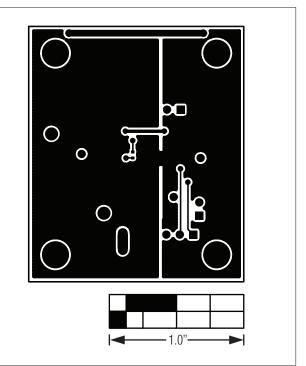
MAX16903 EV Kit PCB Layout—Solder Side
